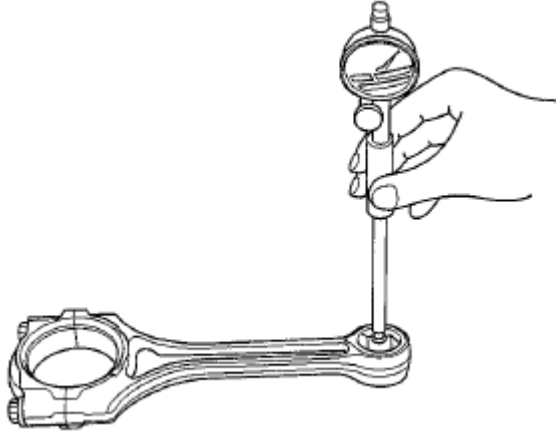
Checking Difference Piston Pin Diameter And Piston Pin Hole Diameter In Piston
